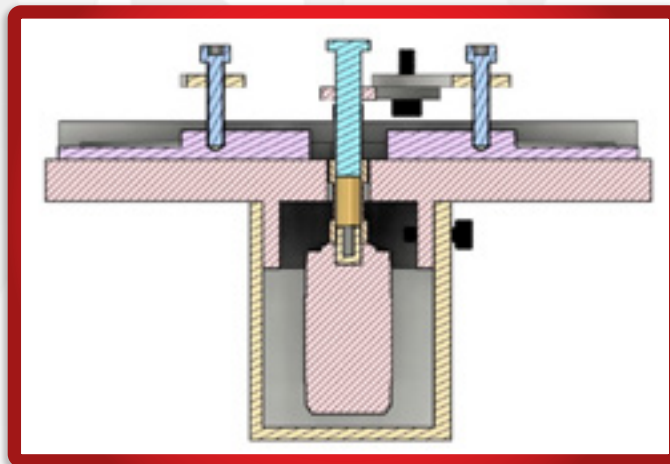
SECTIONAL VIEW OF THE MECHANISM
